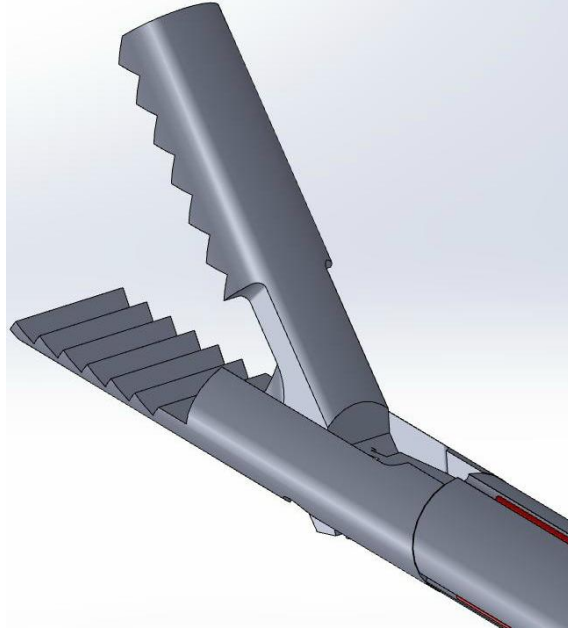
SolidWorks jaw model (outer shaft removed).
